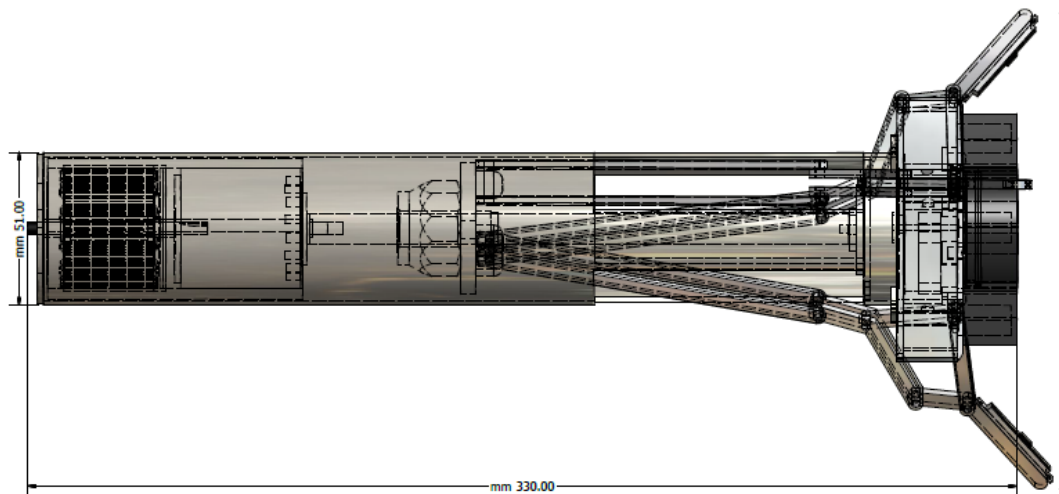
Reentry vehicle LEO payload grasping tool: lateral view [41]. The dimensions were expressed in mm.
